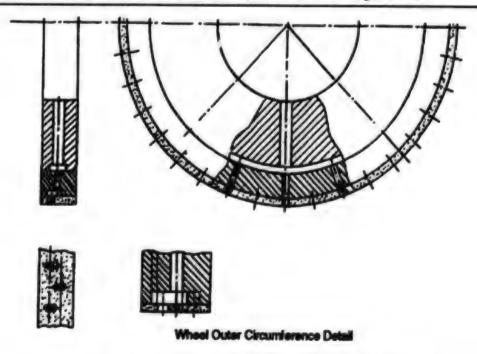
New Outer Surface Through-Liquid CBN Wheel
